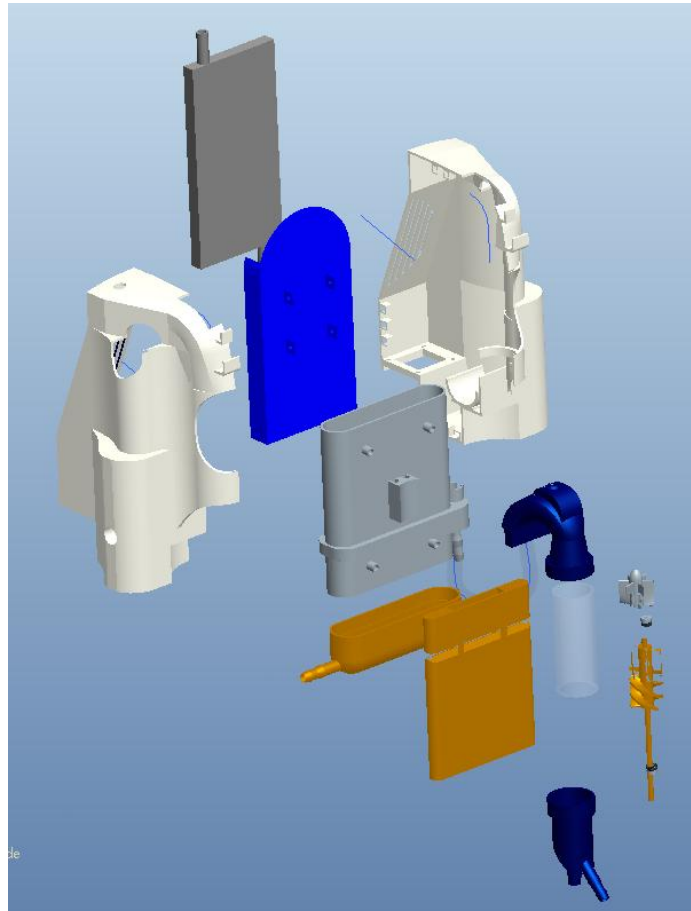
ProEngineer model showing an exploded view of all of the parts that assemble to make the complete integrated design.
